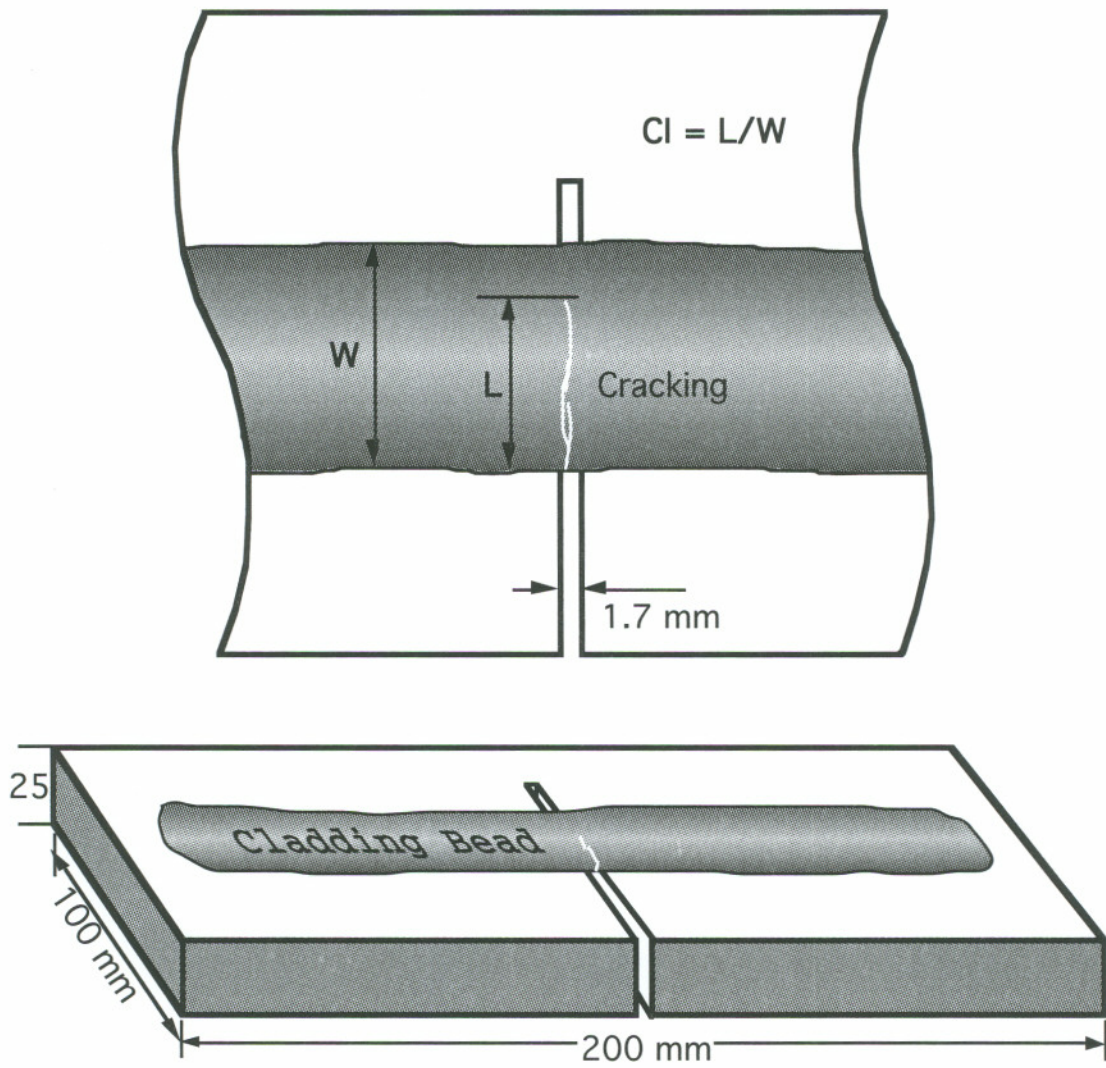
OGI Solidification Cracking Test for Strip Cladding.
